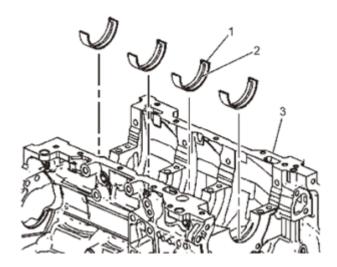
Identifying Bearing And Cylinder Block Courtesy of SUZUKI OF AMERICA CORP.
